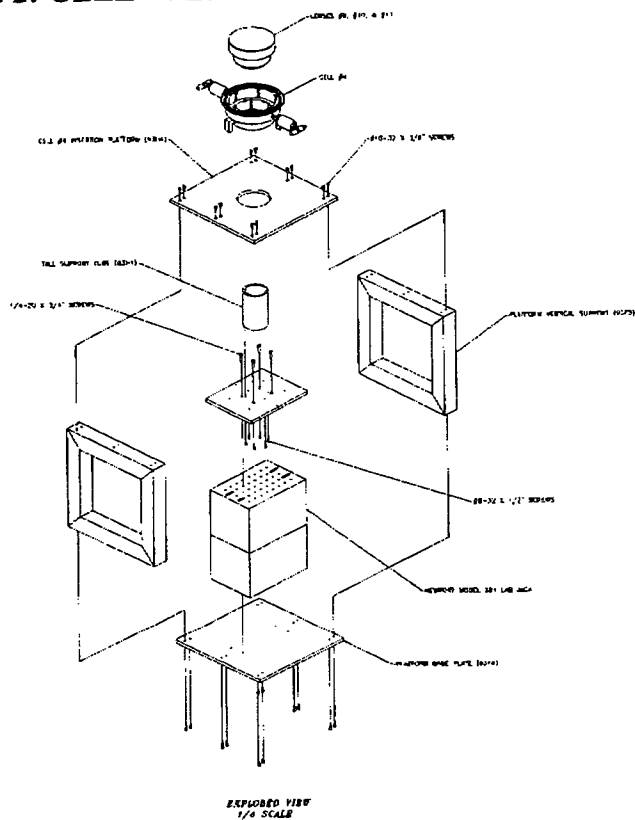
CELL #4 LENS INSTALLATION FIXTURE –EXPLODED
